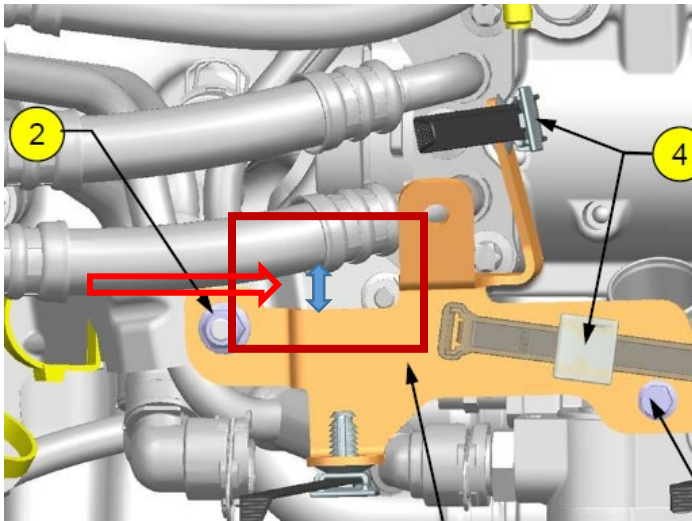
, Where to Measure Clearance Between Low Pressure Fuel Line and Engine Mounting Bracket
